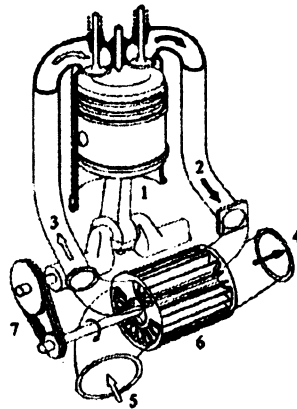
Compresx<sup>®</sup> system: 1 - ICE; 2 – HPG port; 3 – HPA port; 4 – LPG port; 5 -LPA port; 6 - rotor; 7 - drive system.
